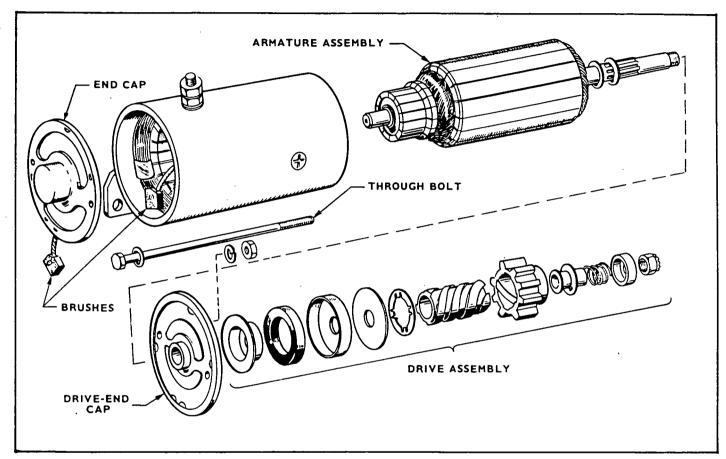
ELECTRIC STARTER ASSEMBLY
